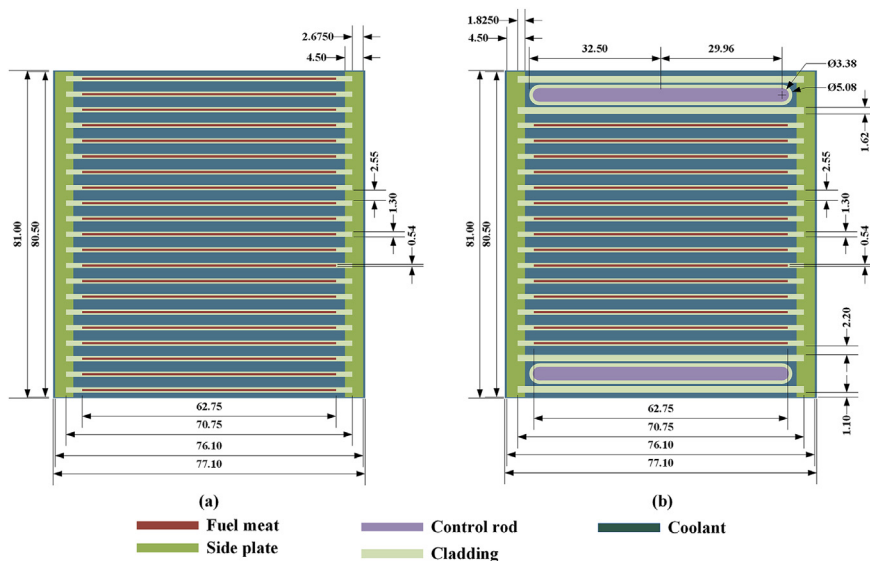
Standard fuel element (a) and control element (b) layout (mm) [6].
